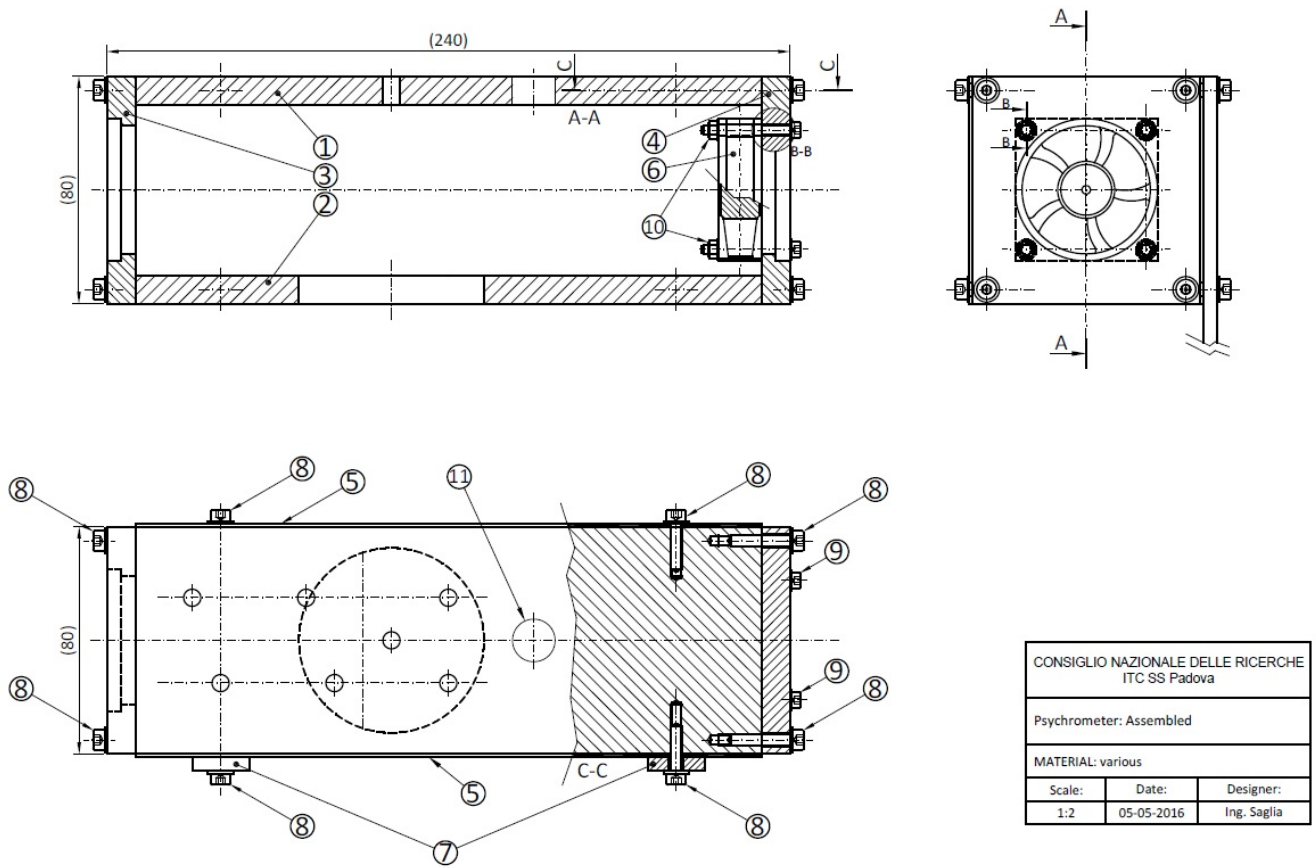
Psychrometer box set. 1) Top plate; 2) Bottom plate; 3) Front plate; 4) Back plate; 5) Side cover; 6) Axial fan; 7) Vertical support; 8) M4 screws; 9) M3 screws; 10) M3 nuts; 11) Inspection hole
